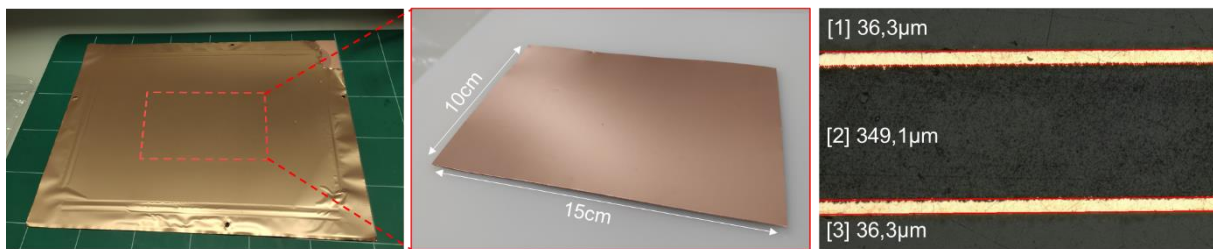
Left) Raw RCC + Mold with cut lines, Middle) Cut-out RCC, Right) RCC cross-section
